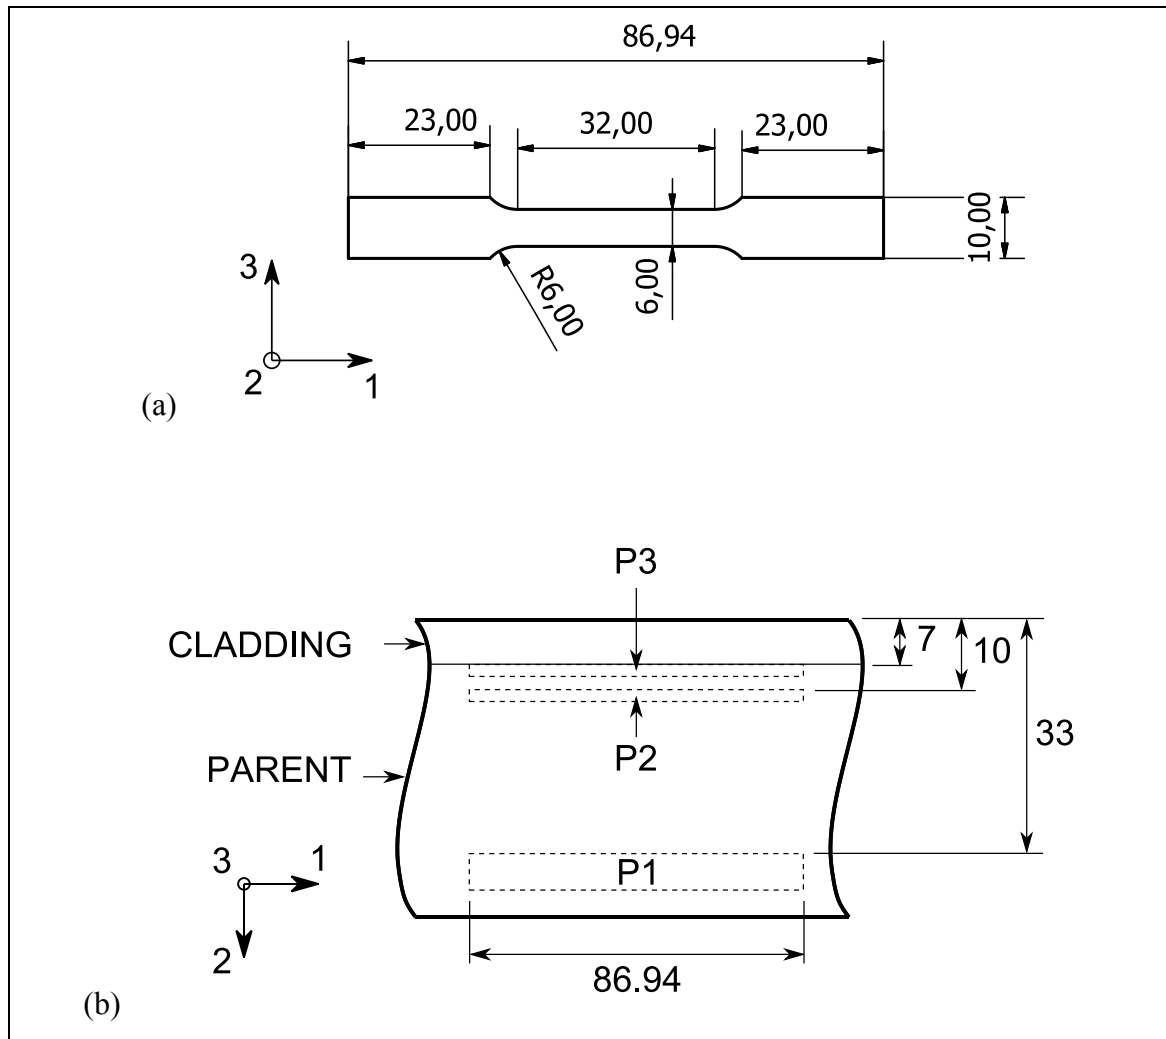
Geometry of the rectangular tensile specimens extracted from the parent material in the post-weld heat-treated plate (a), and a schematic of the positions from which the specimens were extracted relative to the interface (b). Dimensions are in mm.
